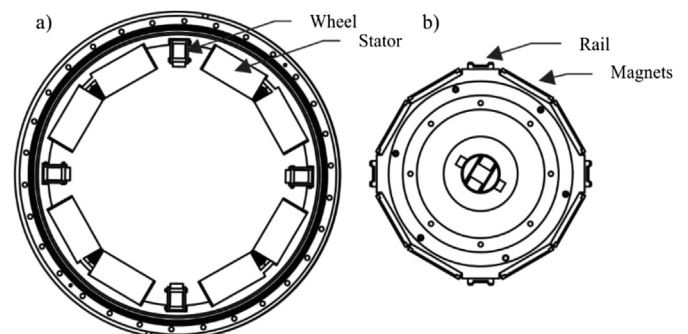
a) Design of the stator inside the capsule. b) The translator with mounted permanent magnets.
